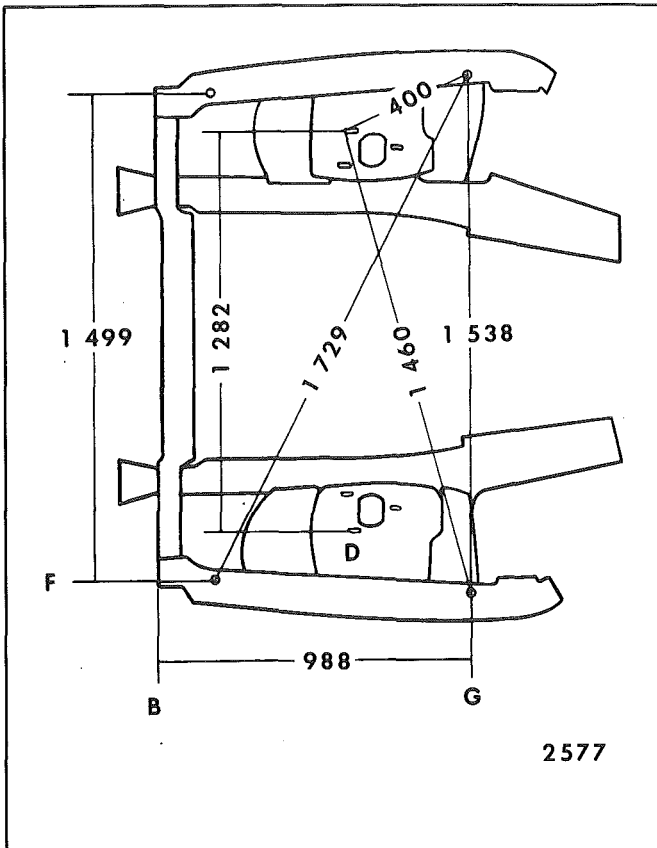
Suspension Strut and Upper Rail Dimensions
